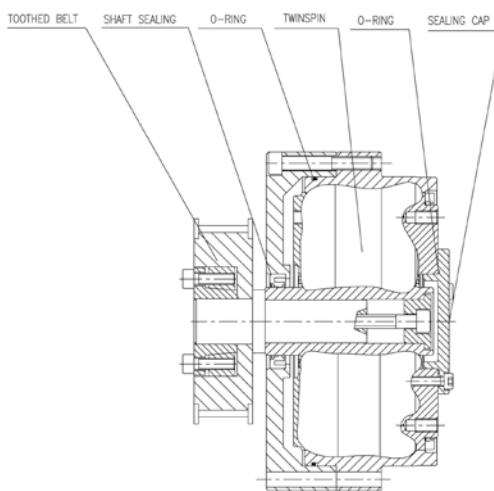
Connection of reduction gear with toothed belt
